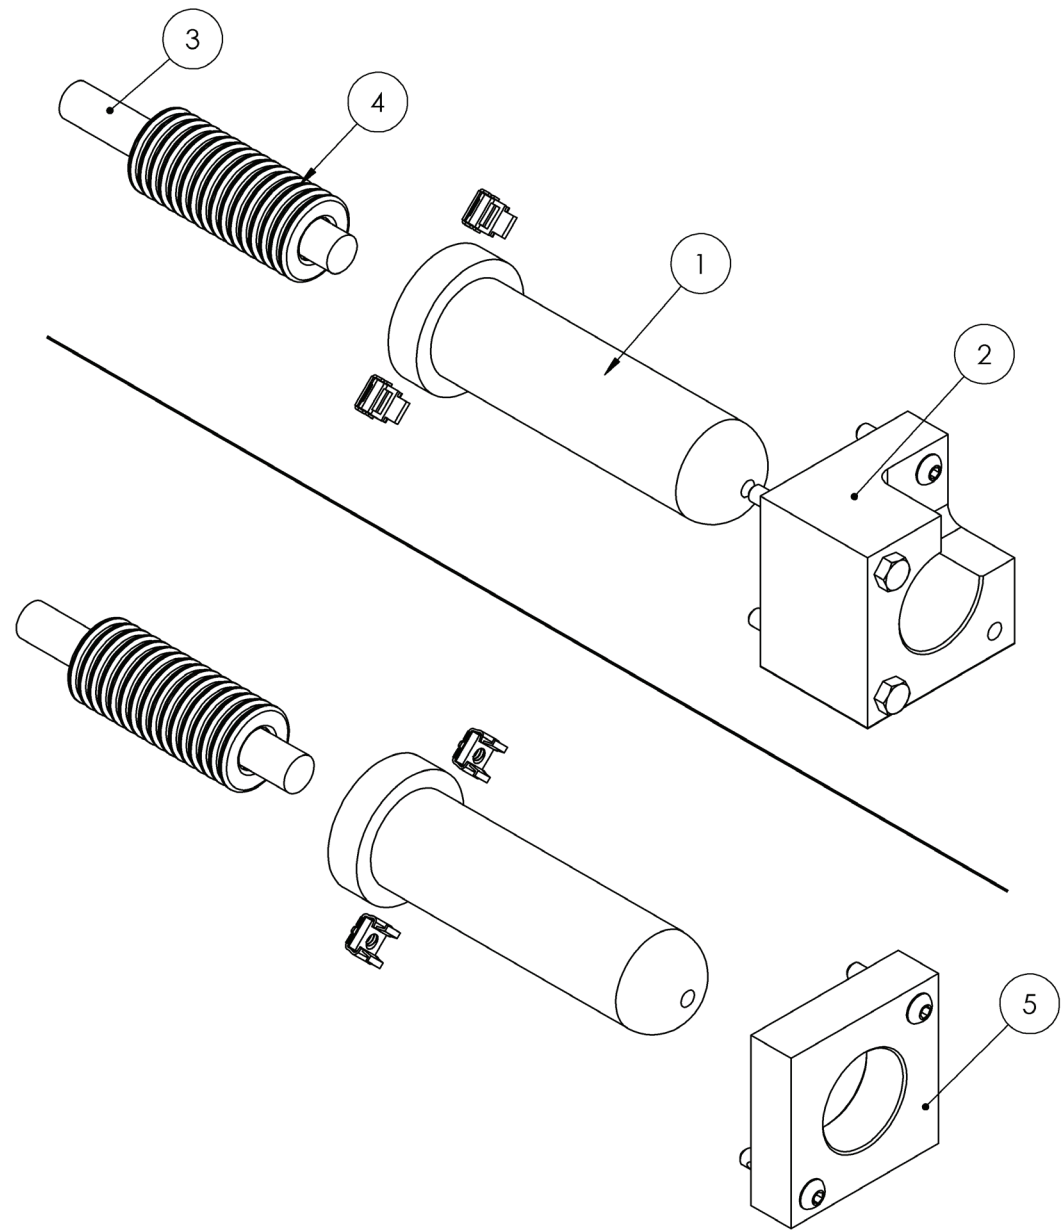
HB-1030/1430 Pothole Actuator Subparts
